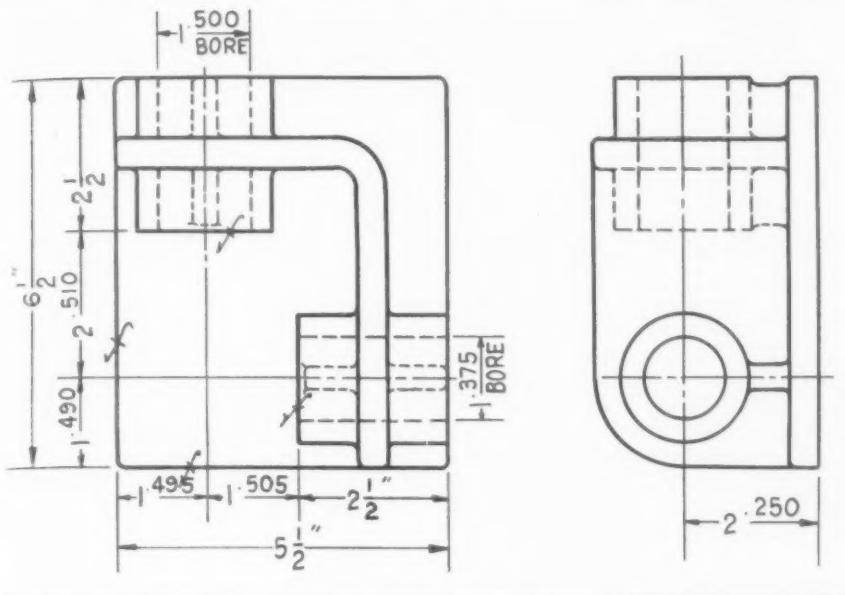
Working drawing of the nucleus of a master gage used in checking bevel gears. The boring of the holes in this gage was accomplished on a horizontal milling machine, equipped with rear controls. The Center Scope was used for accurately locating the milling machine spindle. Locating time, first hole: 120 seconds; second hole: 50 seconds; tolerance obtained to .0005-inch accuracy.
